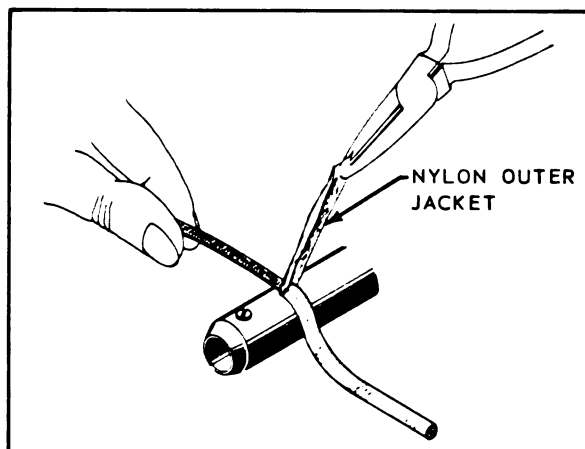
Stripping Outer Jacket from Shielded Cable
